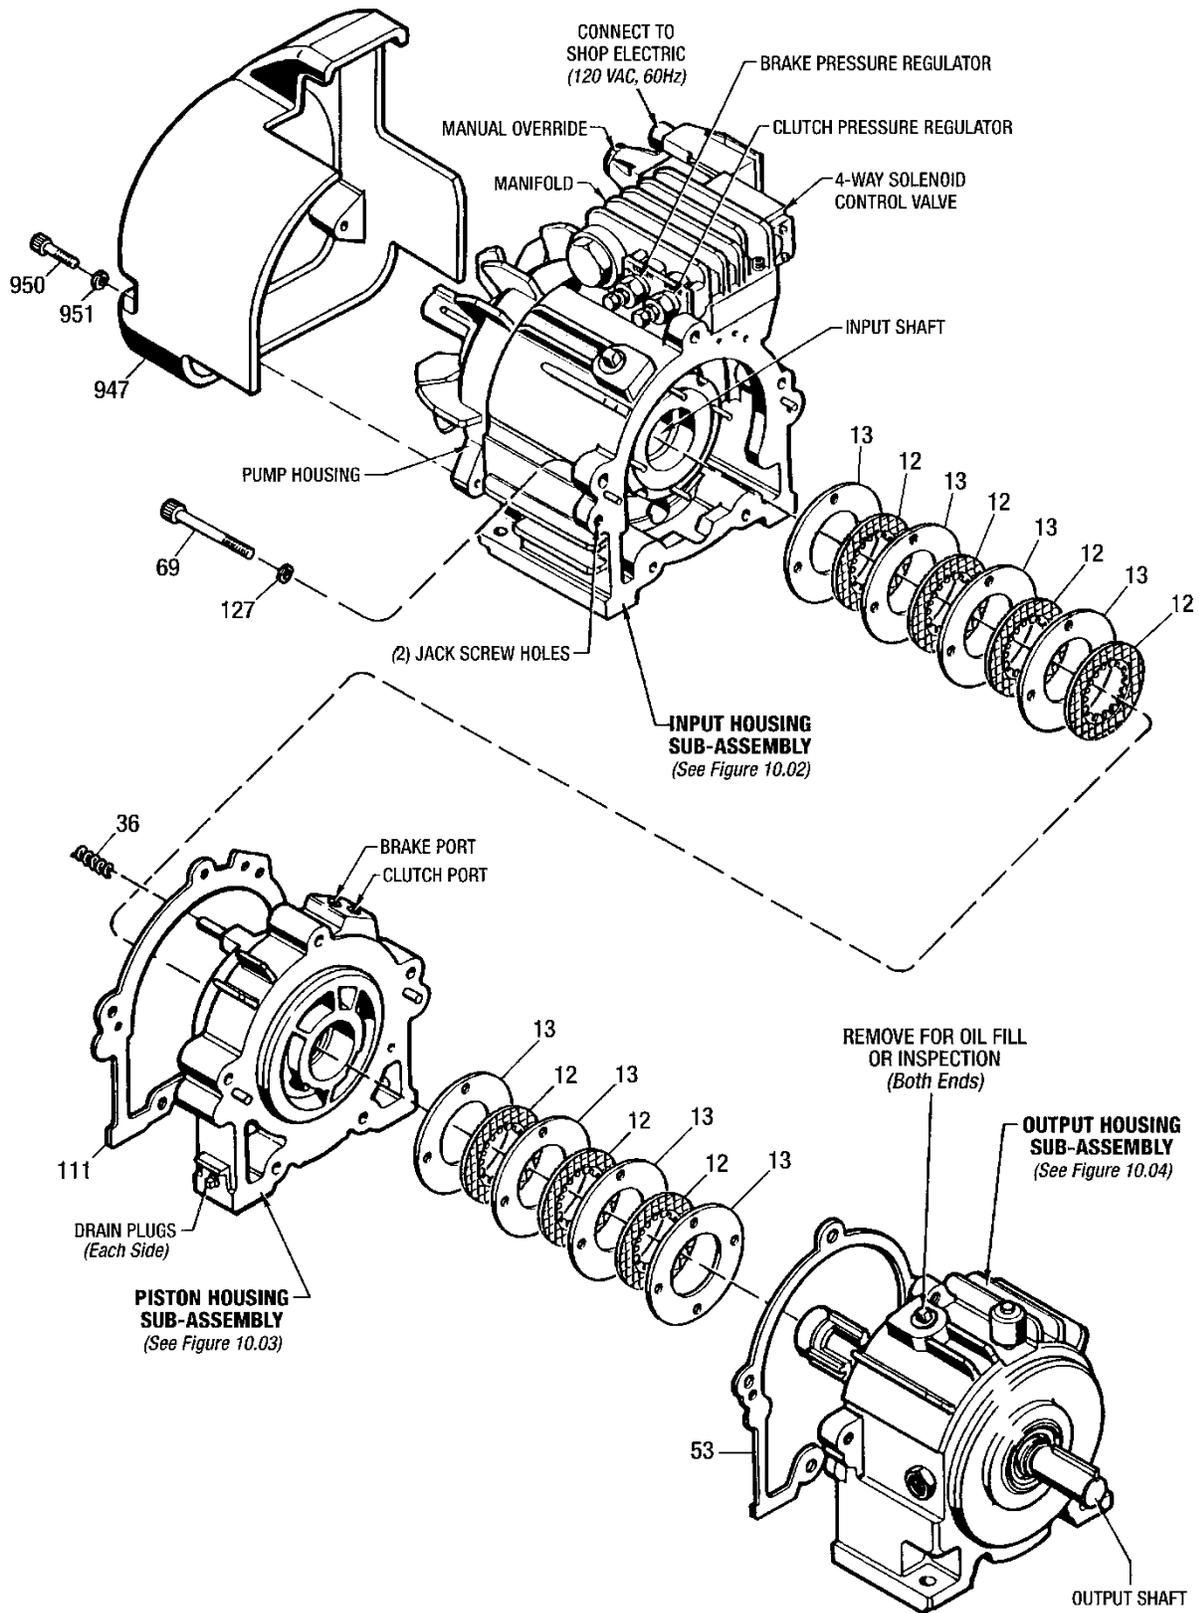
Main Sub-Assemblies & Clutch/Brake Stacks
